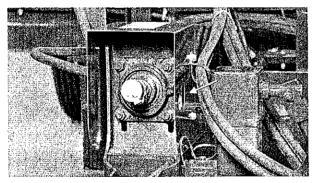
Driveline Bearing Zerk for All Units Arrow Indicates Grease Zerk Access Opening.
